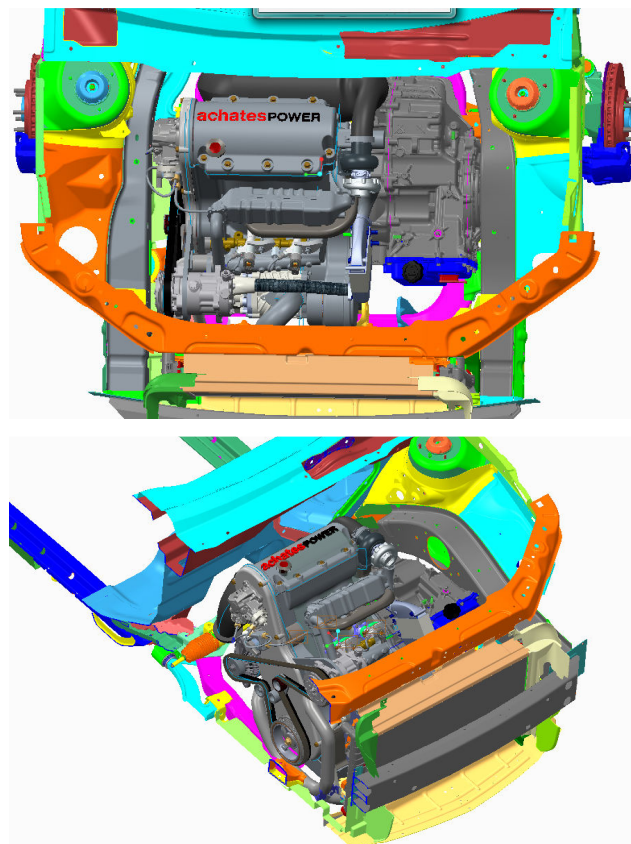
CAD showing 1.5L OP2S engine packaged in passenger car application.
